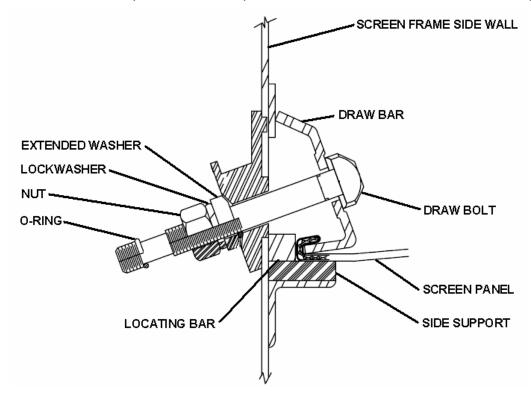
Rapid Change Draw Bolt Assembly Components
